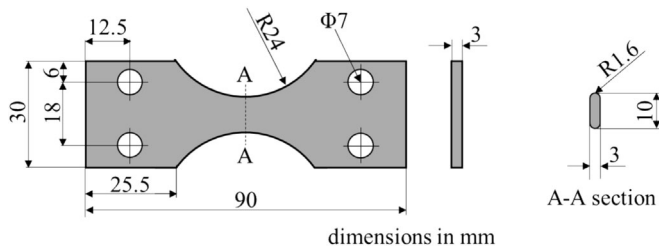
Shapes and dimensions of the plane-bending fatigue test specimen.
